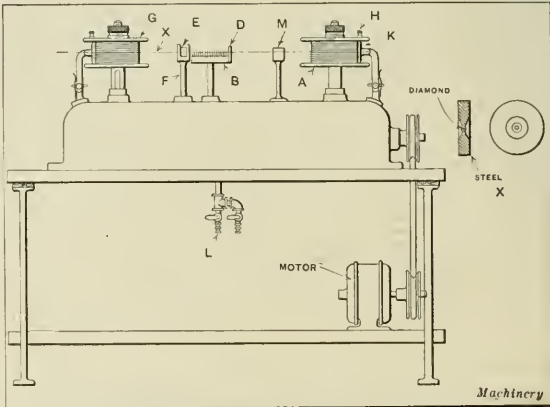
Machine used for drawing Tungsten Wire through Diamond Dies
